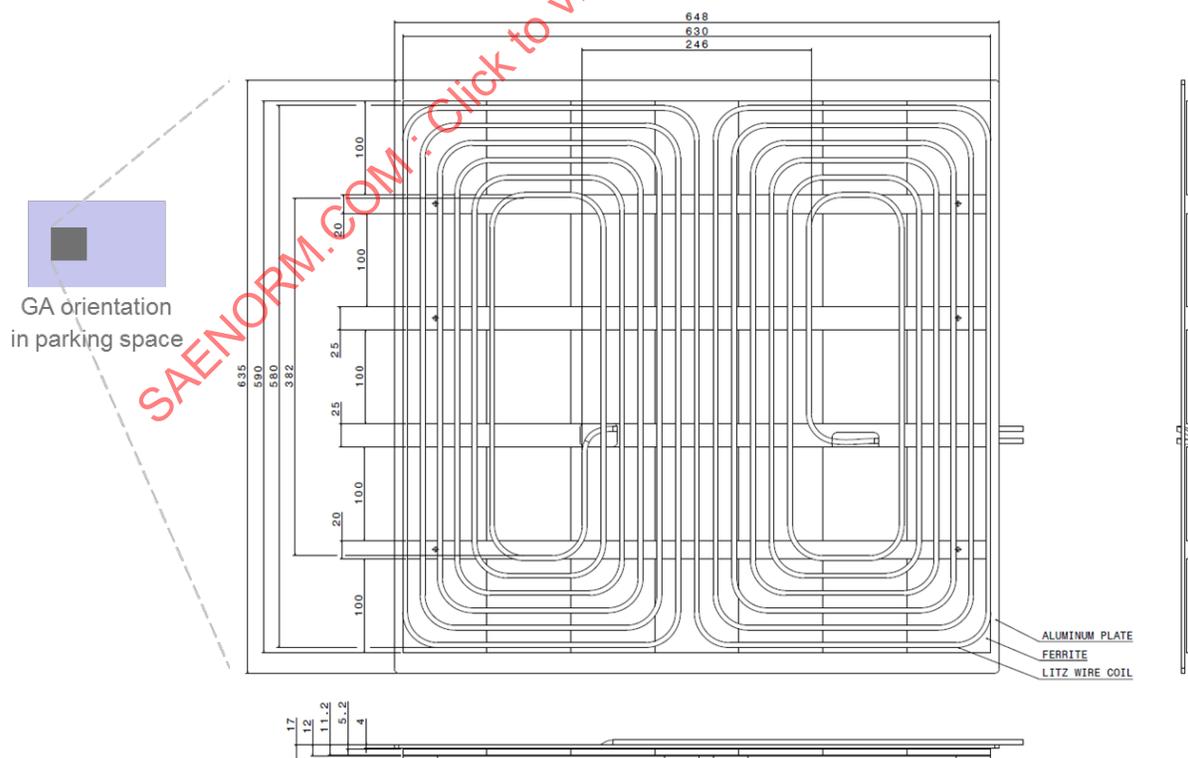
Mechanical dimensions of the Product GA WPT3
